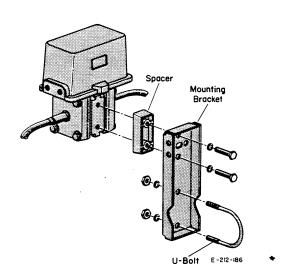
Assembling Optional Mounting Bracket Kit, Accessory (146)
